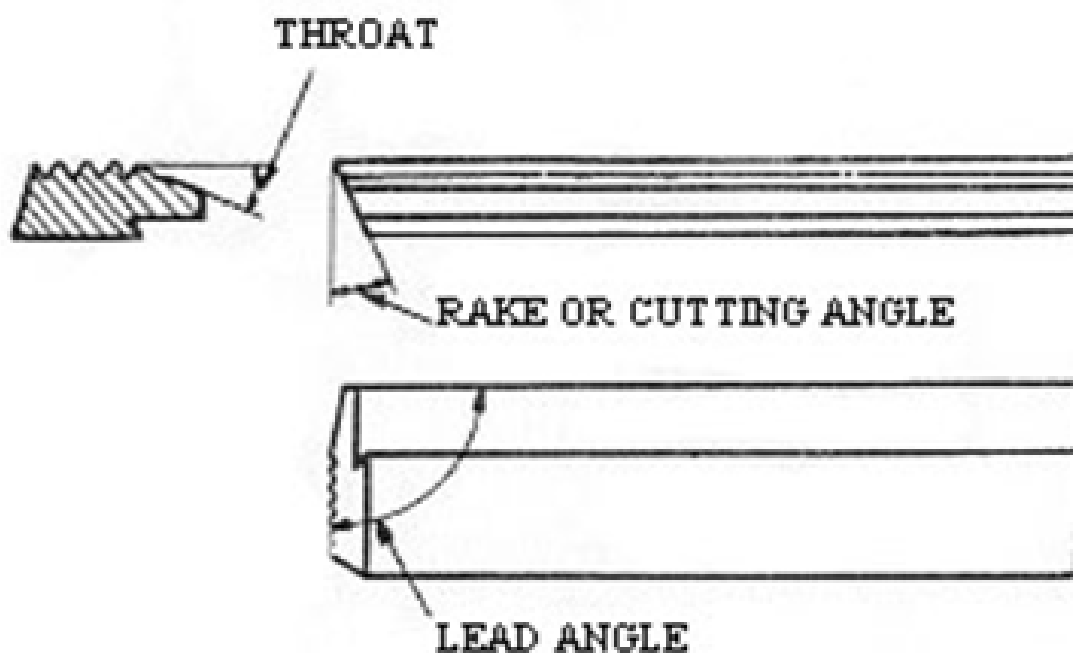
The rake (cutting) angle of the chaser will vary depending on the machinability of the material being threaded. The optimal angle should be determined through practical experimentation. Use the following table as a guideline for initial settings.
